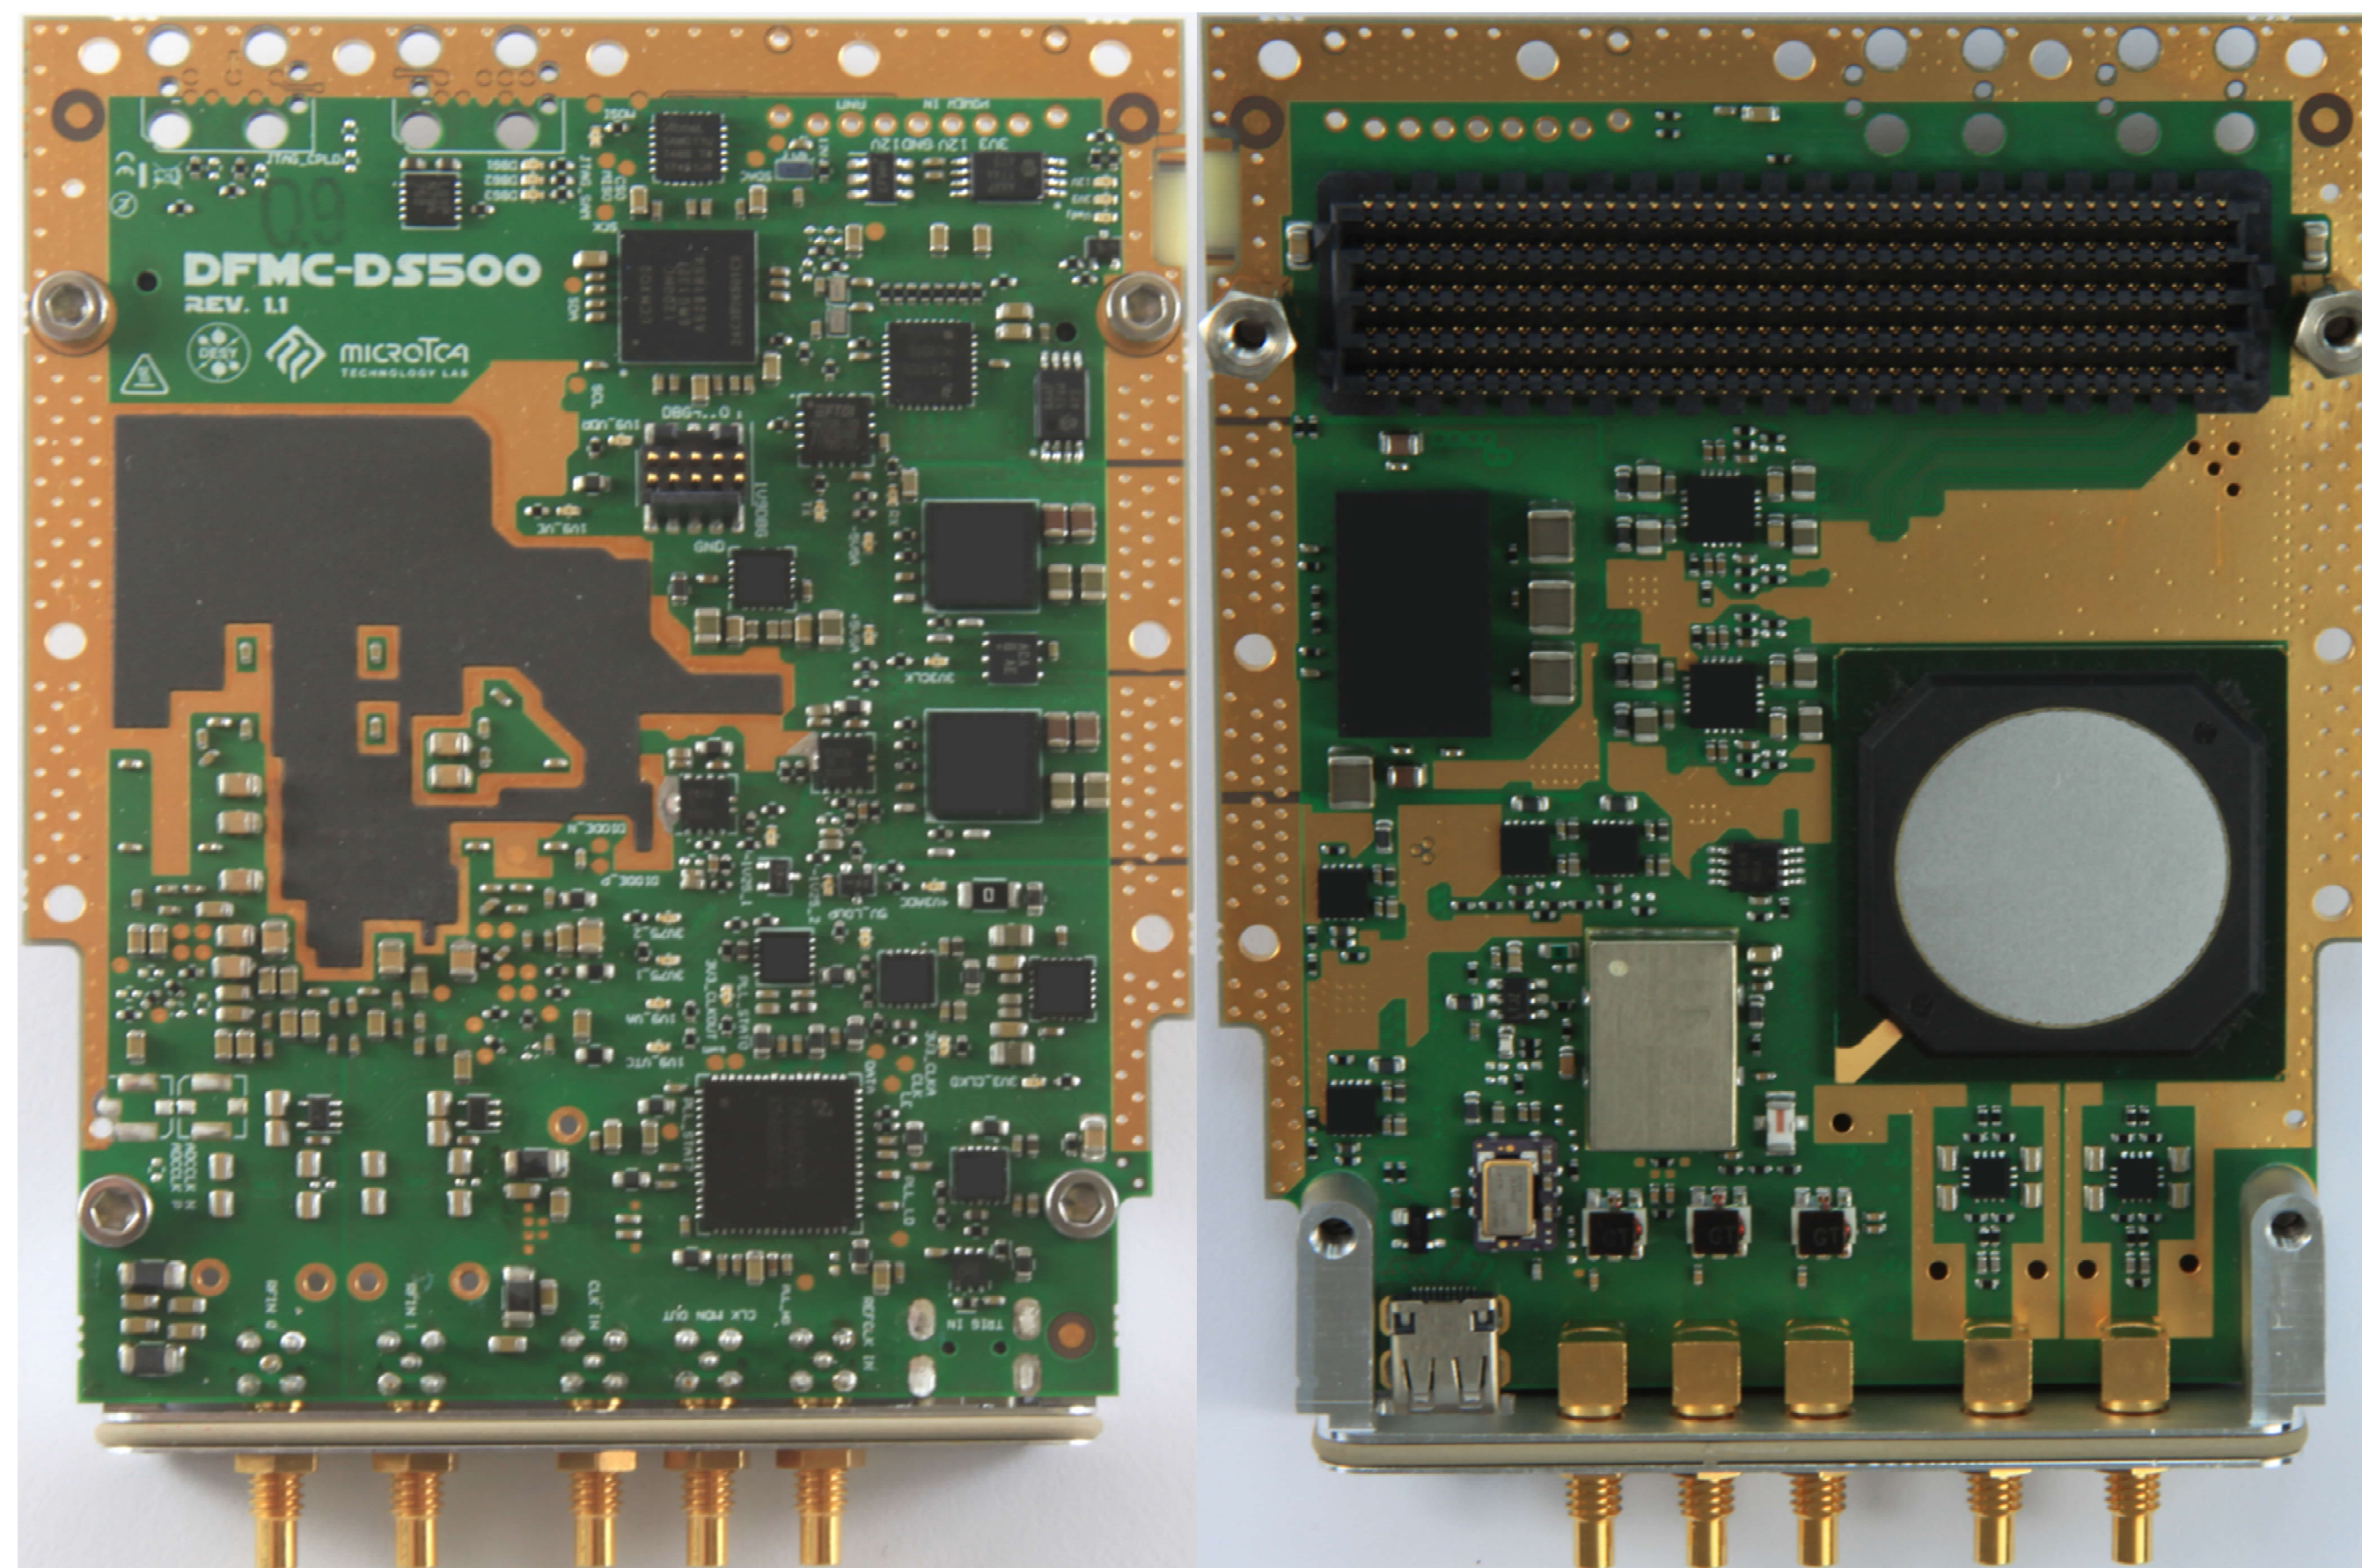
DFMC-DS500 board, left: bottom view, right: top view
